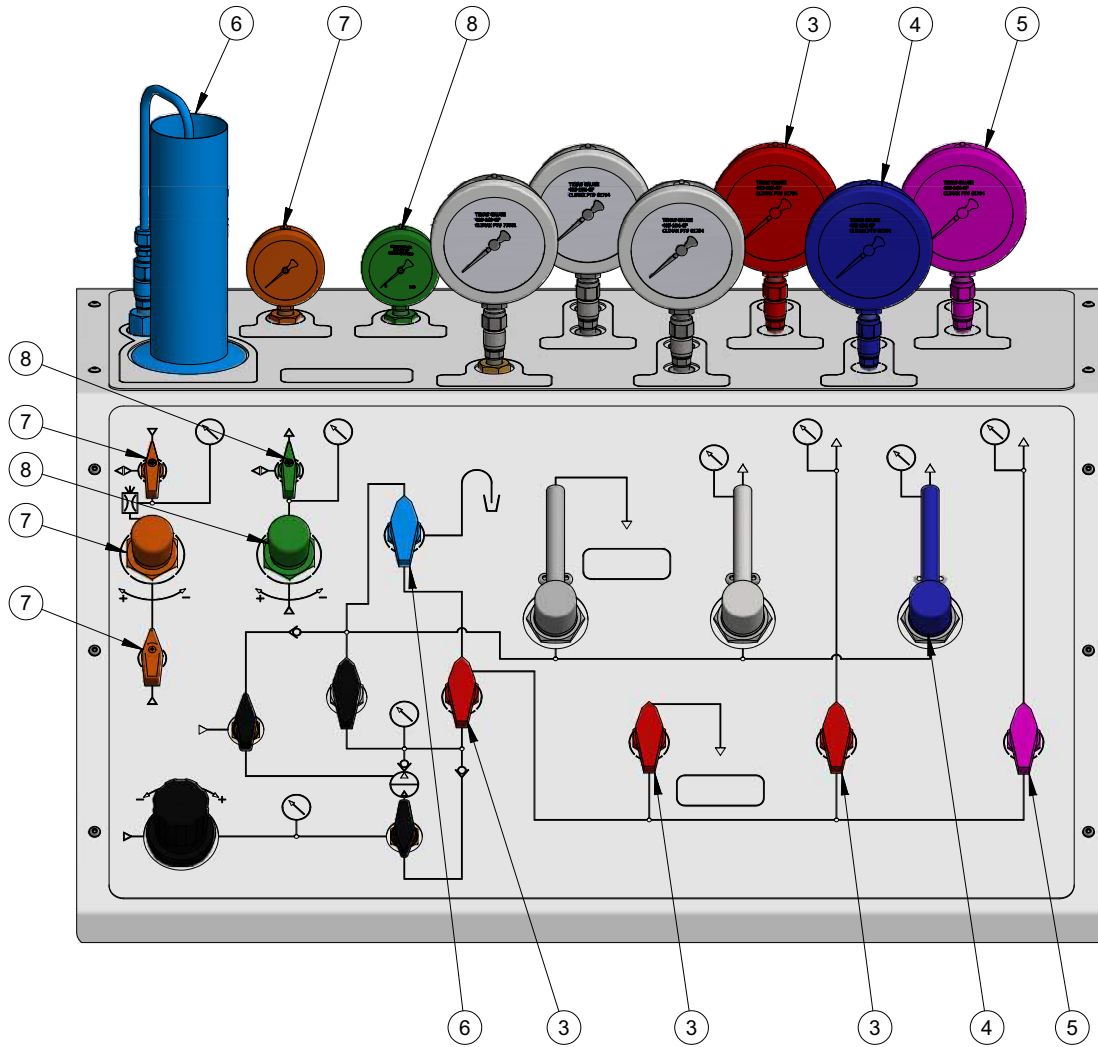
HPC-10K BASE ASSEMBLY BACK VIEW (P/N 90354)
